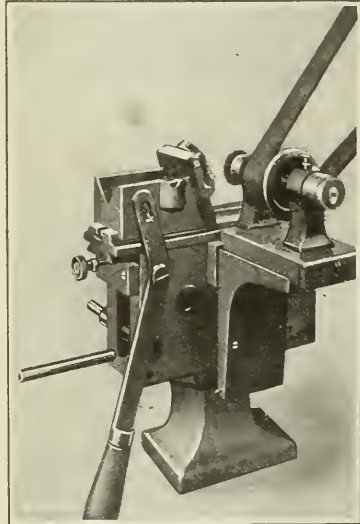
Hand Milling Machine and Fixture used for cutting off Setting Pin to Length
